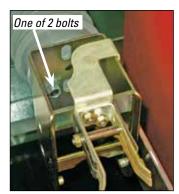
Loosen bolts that secure hinge to insulator; reinstall fuse assembly; pull up on hinge until gap is 1/8" or less and the contact rod engages the latch face.
